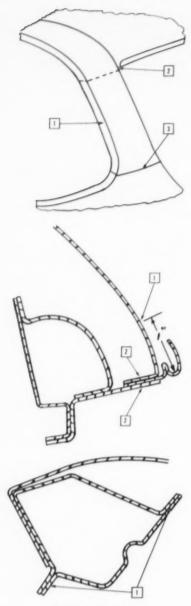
Cross-section view at top center of rear window, showing roof panel and rear window upper center outer rail assembly which is welded to rear window upper center inner rail on four-door sedan and hardtop models:
